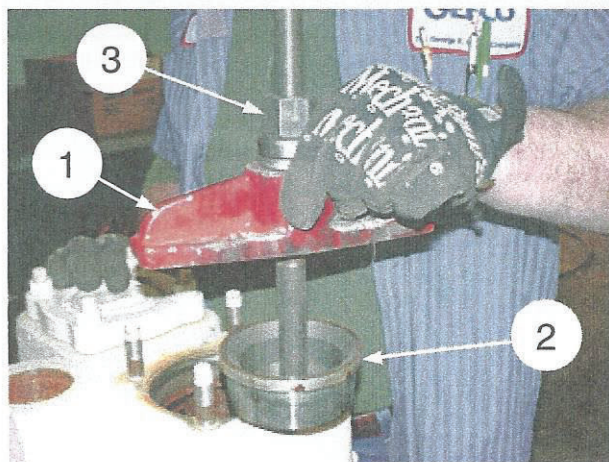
Mud Pump Valve Seat Removal; After the puller nut [3] has been tightened sufficiently, the valve seat [2] will release and then the puller assembly [1] and the valve seat [2] can be lifted out as shown.
